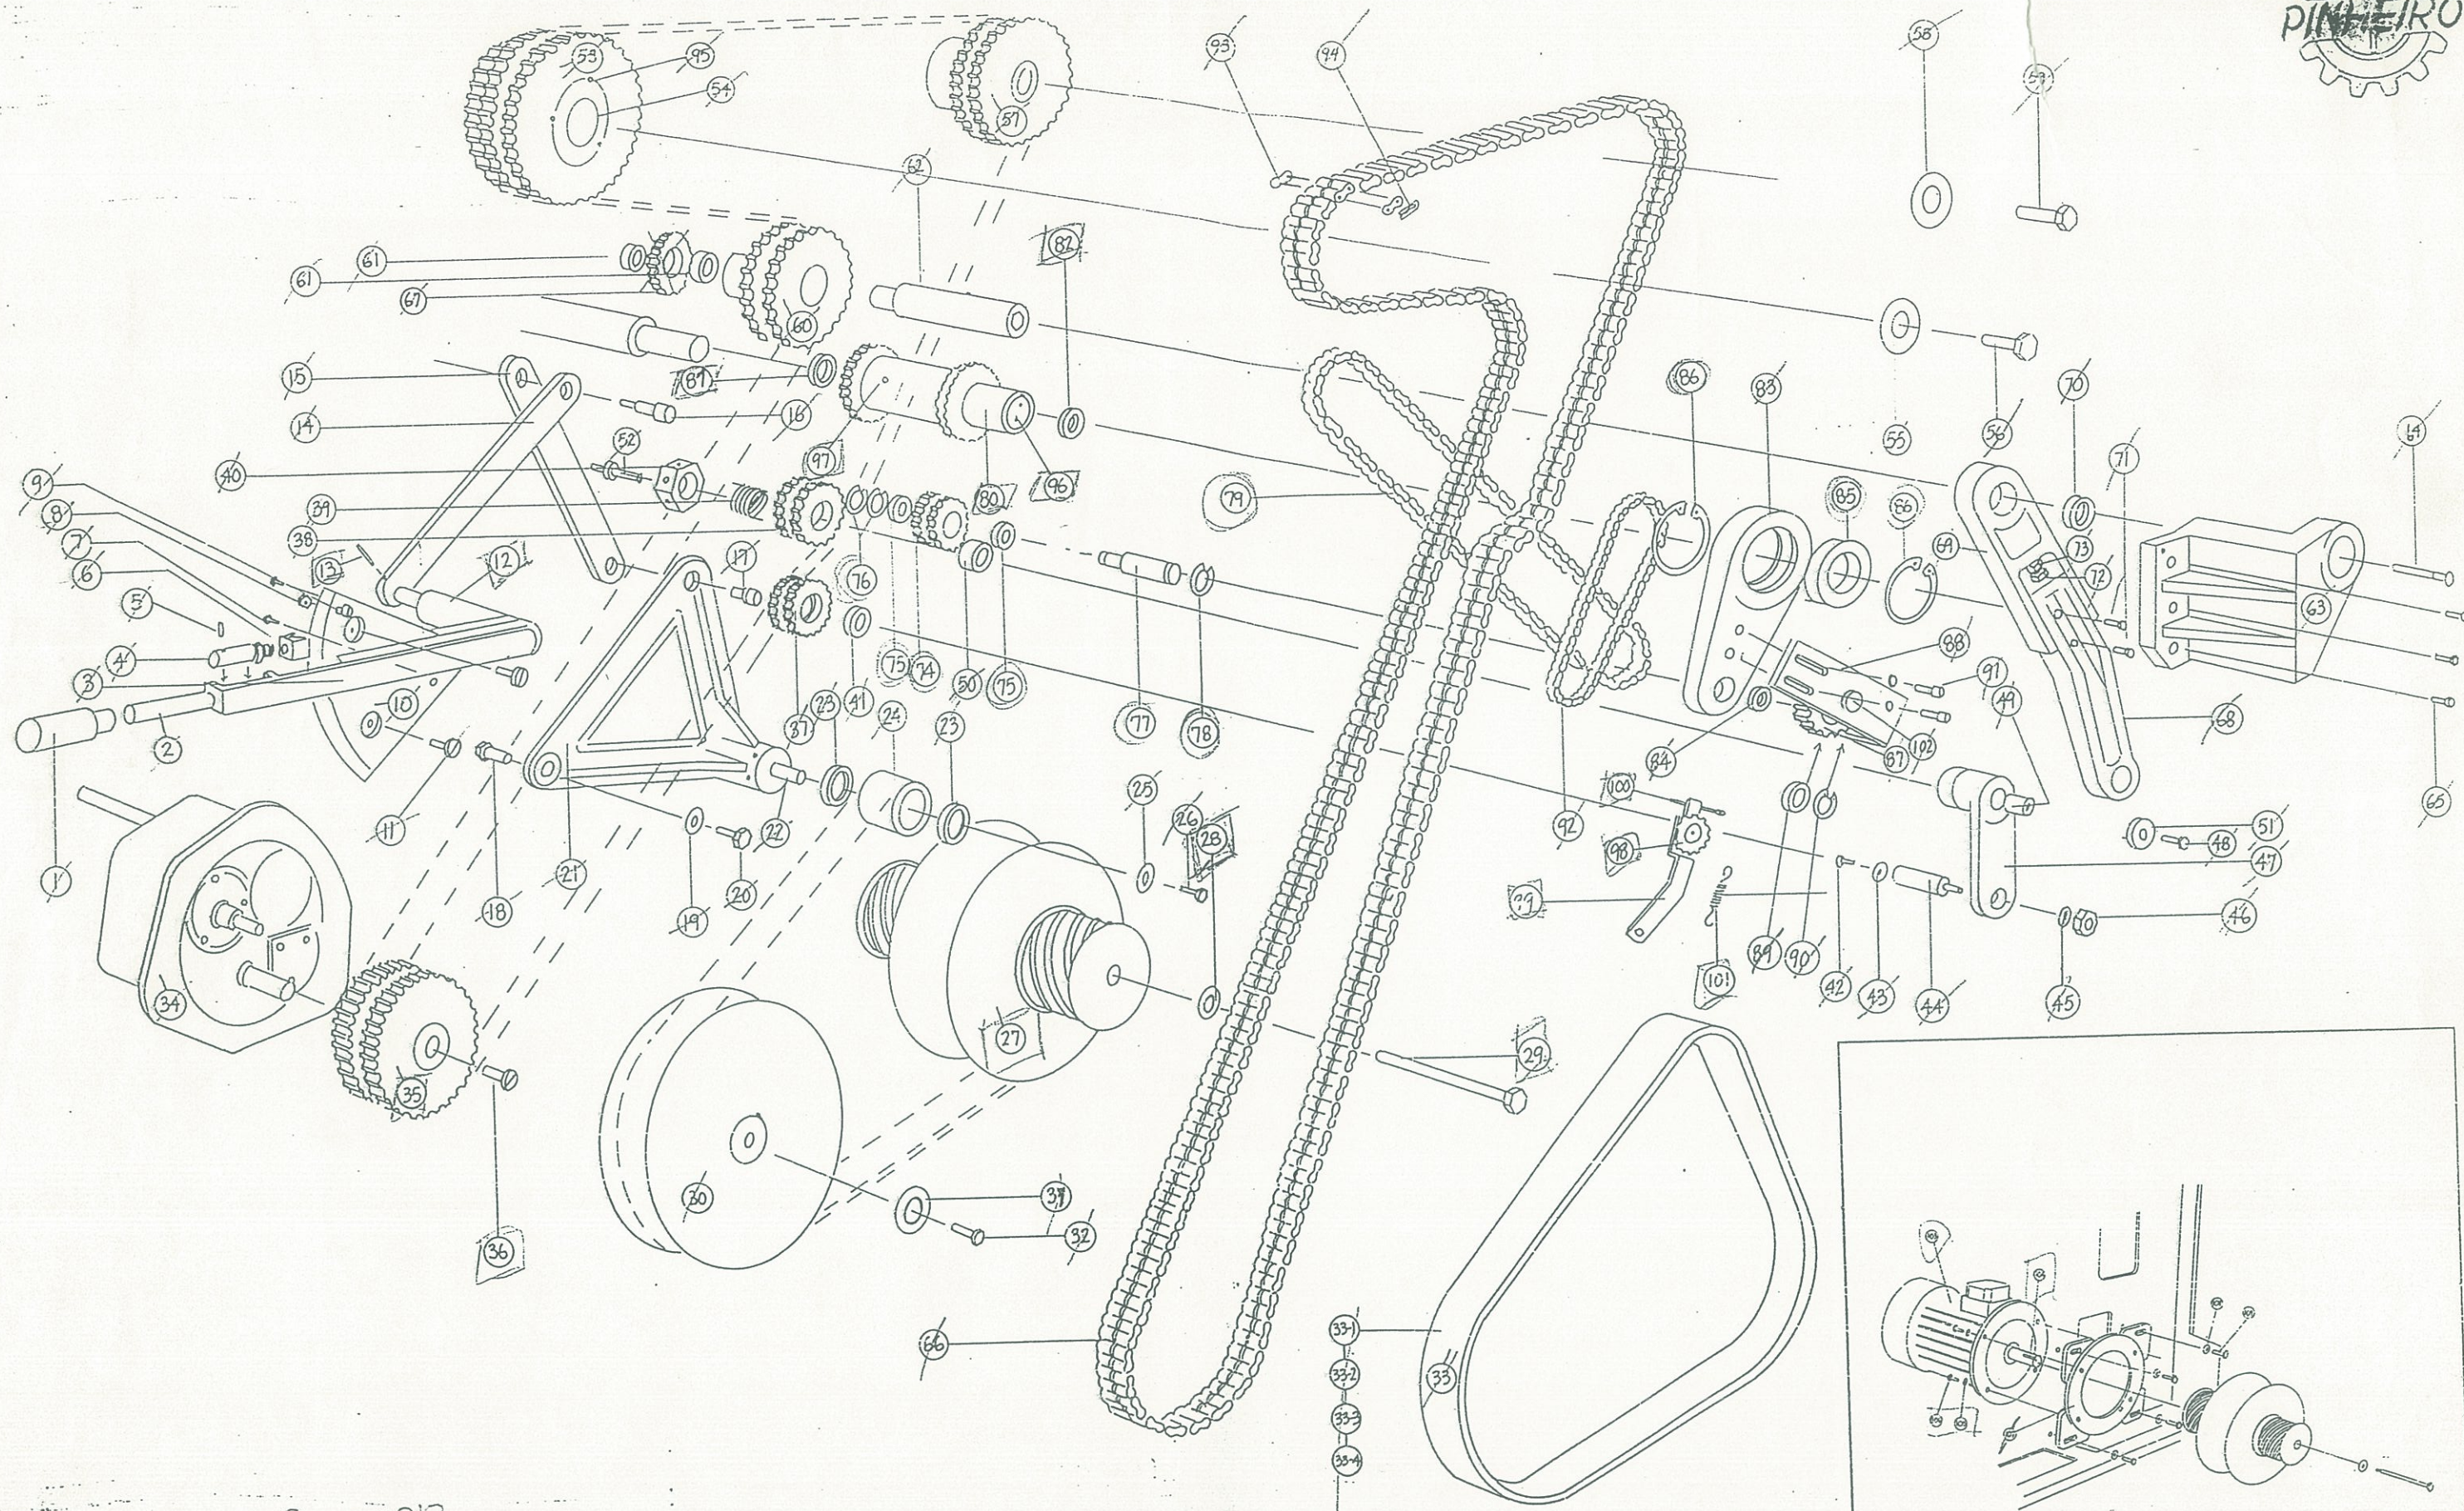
MF TOP FEED ROLL & CUTTER HEAD ASSEMBLY
